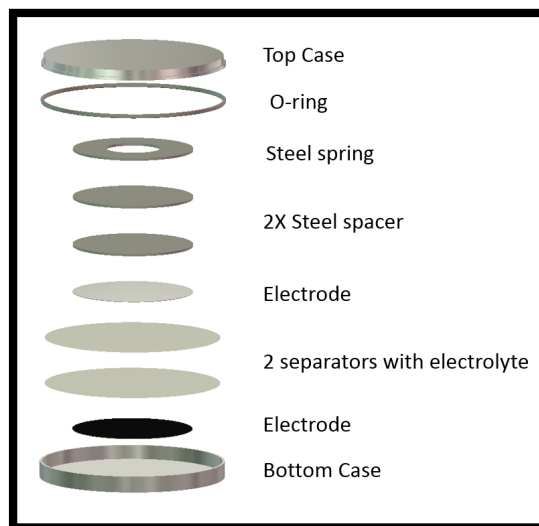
Schematic showing exploded view of the coin cell assembly
